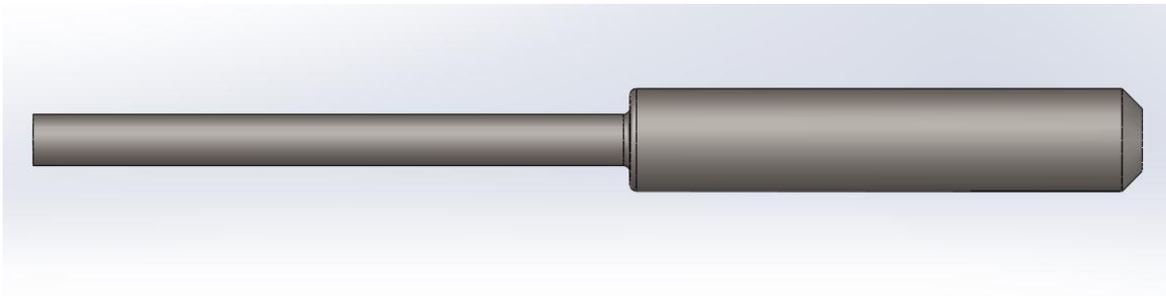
Final Drive End Design, Retractable Shaft, Side View
